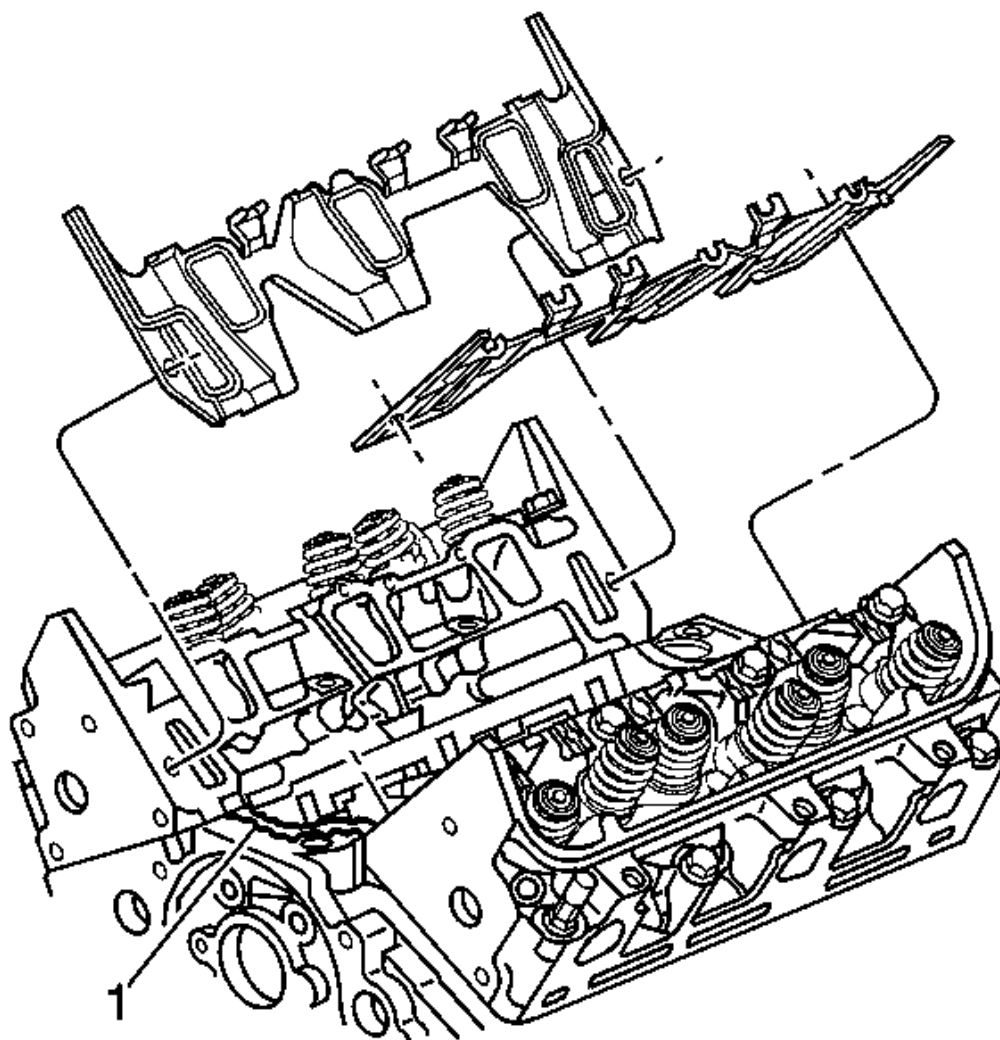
View Of Lower Intake Manifold Gaskets & Seals
